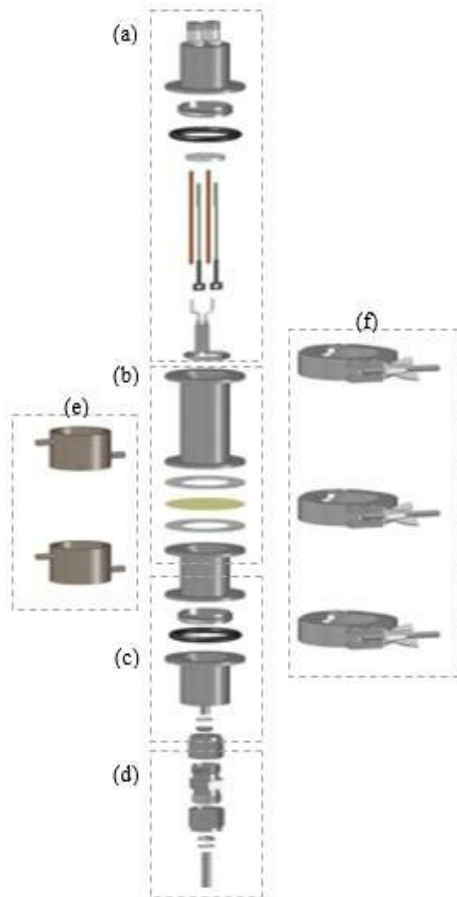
The exploded diagram of vacuum inhalation chamber; (a) a vacuum heating chamber, (b) a sample placement cavity, (c) a vacuum chamber, (d) a vacuum connected group, (e) cooling rings, (f) clamps
